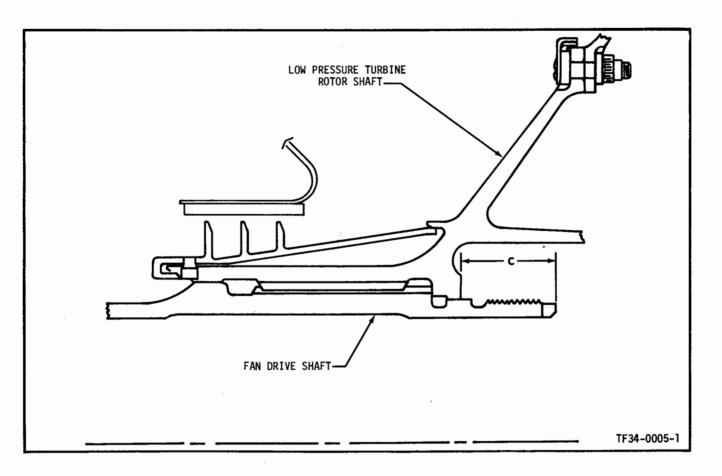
Low-Pressure Turbine Rotor Seating Dimensions - After Installation
